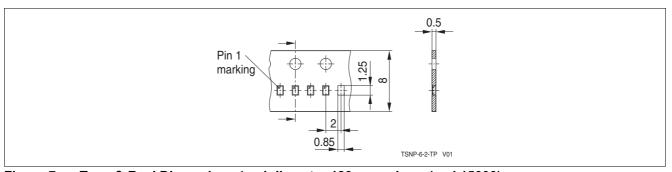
Tape & Reel Dimensions (reel diameter 180 mm, pieces/reel 15000)
